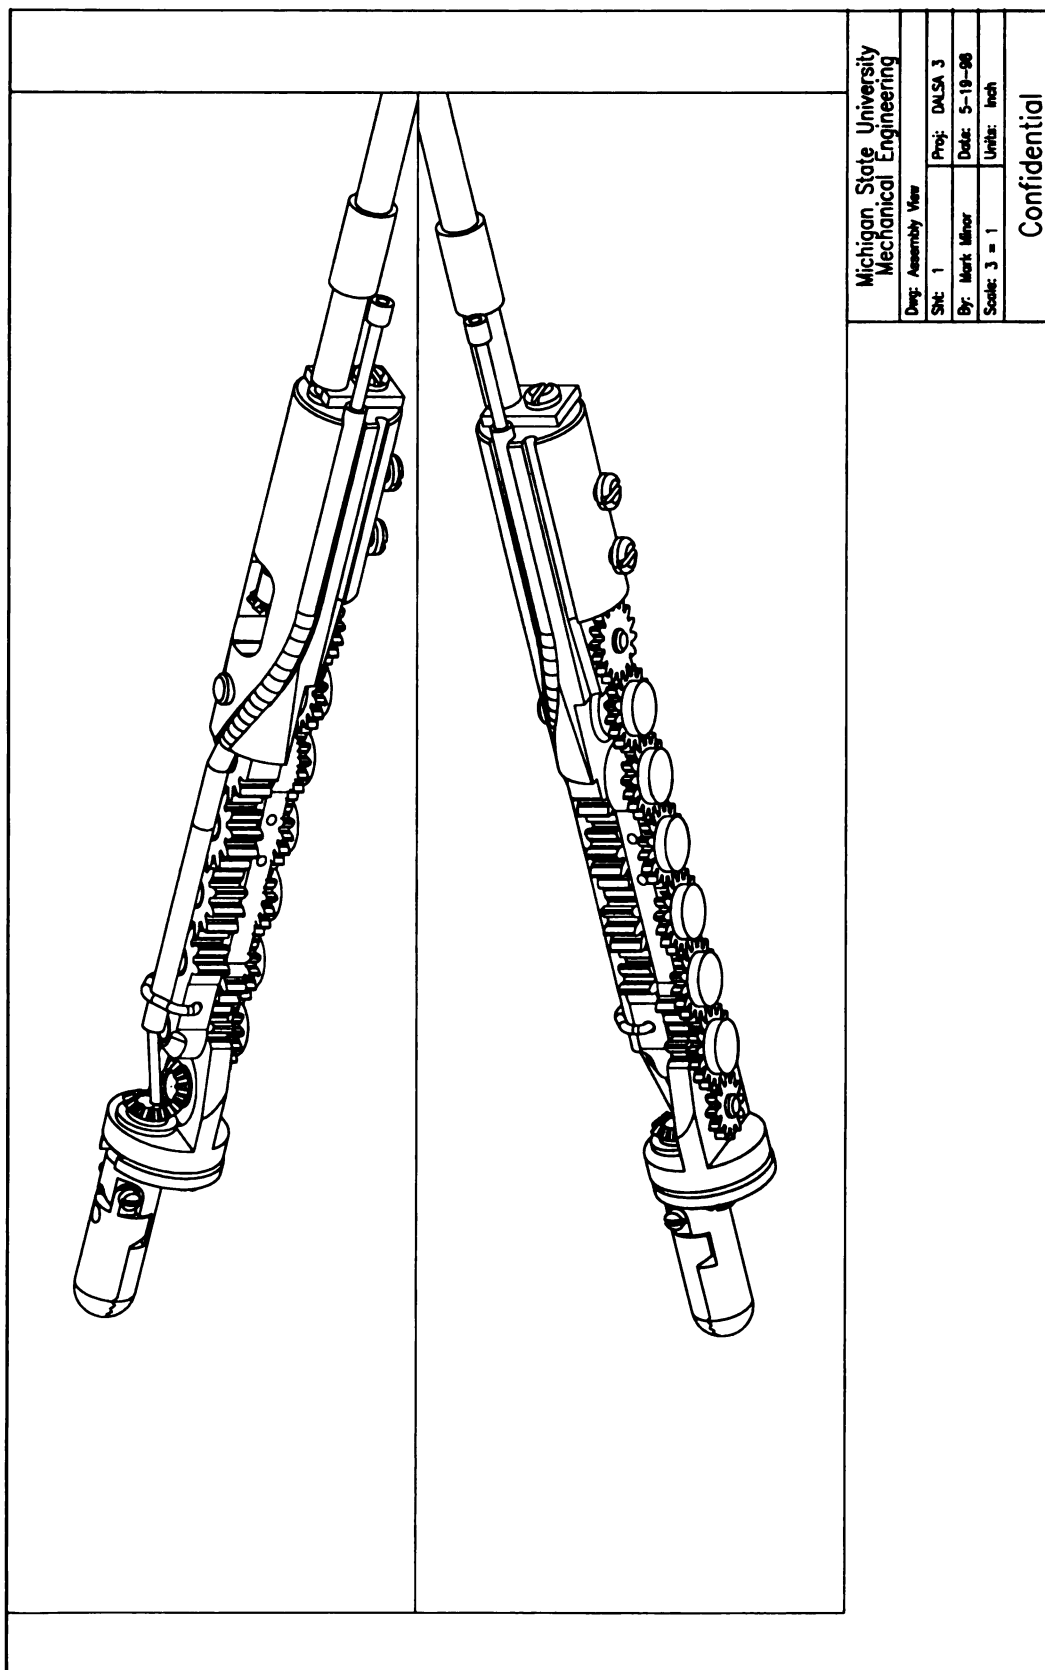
Assembled view of DALSA surgical mechanism (sheet 1).
